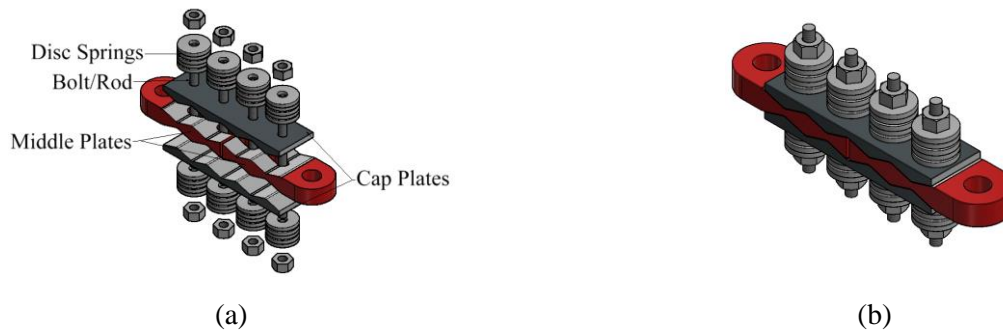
(a) Components of the RSFJ, (b) RSFJ assembly
